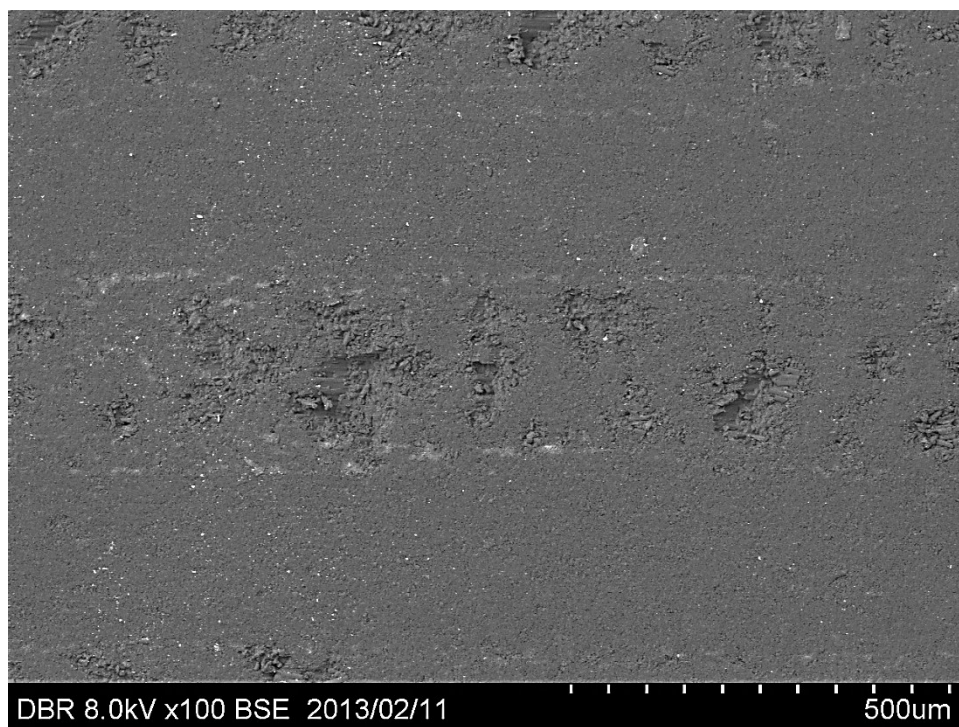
SEM image of finish surface of material C (45°-45°) machined with Tool No. 1 (Helix angle 0°) (Down cut method)
